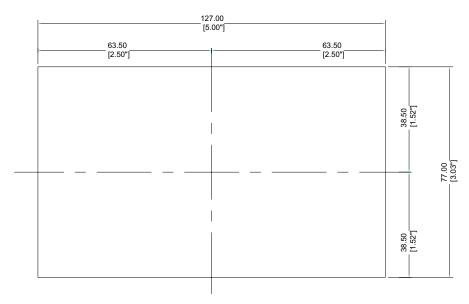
Large Display Keypad Mounting Dimensions Part # : KPMX3LLCD
